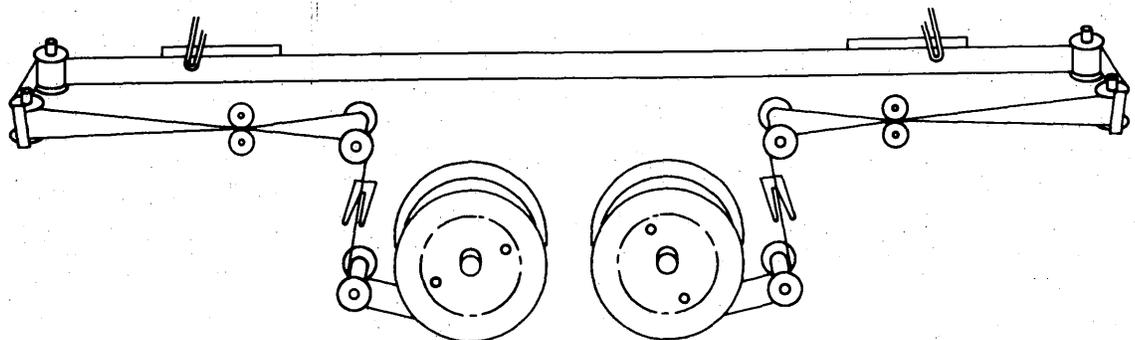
DATASPEED 40 Printer Ribbon Assembly
